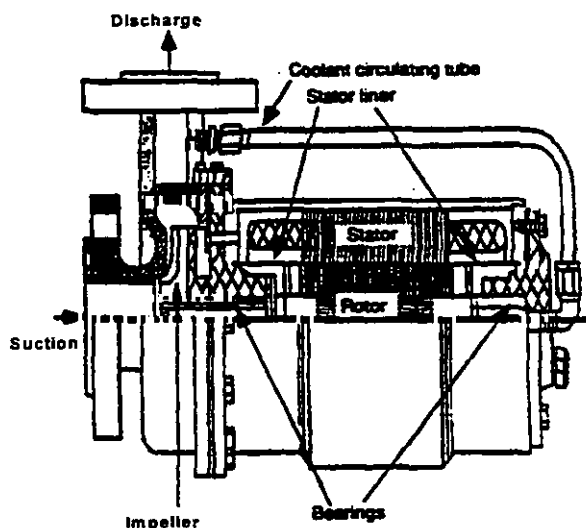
Diagram of seal-less canned-motor pump (U.S. EPA, 1990, P. 2-11).
